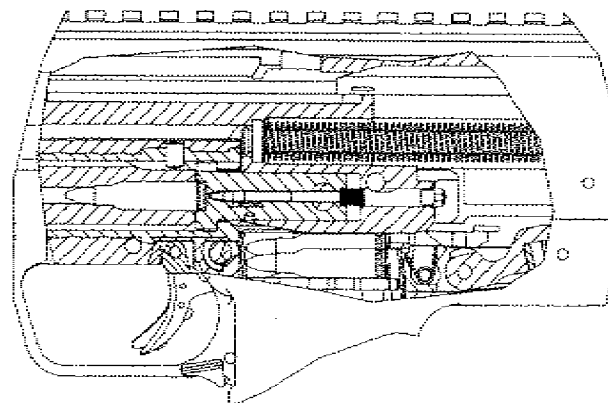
Bolt locked, cartridge chambered, hammer cocked
